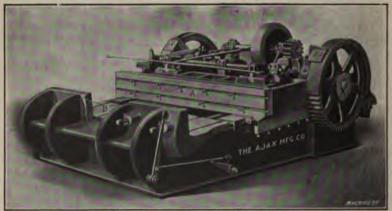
Ajax No. 7 High-speed Bulldozer—an Adjunct to the Forging Machine ing machine known as the bulldozer, which is used extensively as an auxiliary to the forging machine in the manufacture of many forgings.
